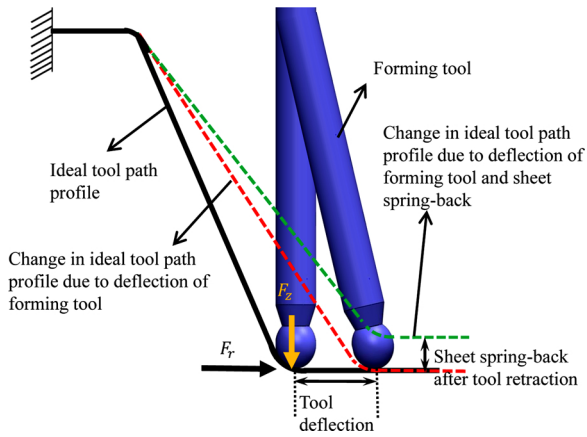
Schematic showing the forming tool deflection due to radial force (F_r) and sheet spring-back after tool retraction (F_z : axial force).
